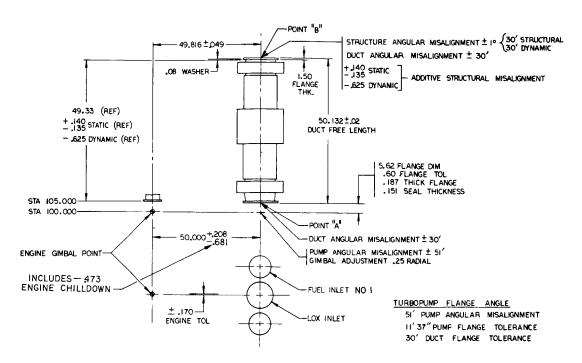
S-IC-T TOLERANCES AND DEFLECTIONS
